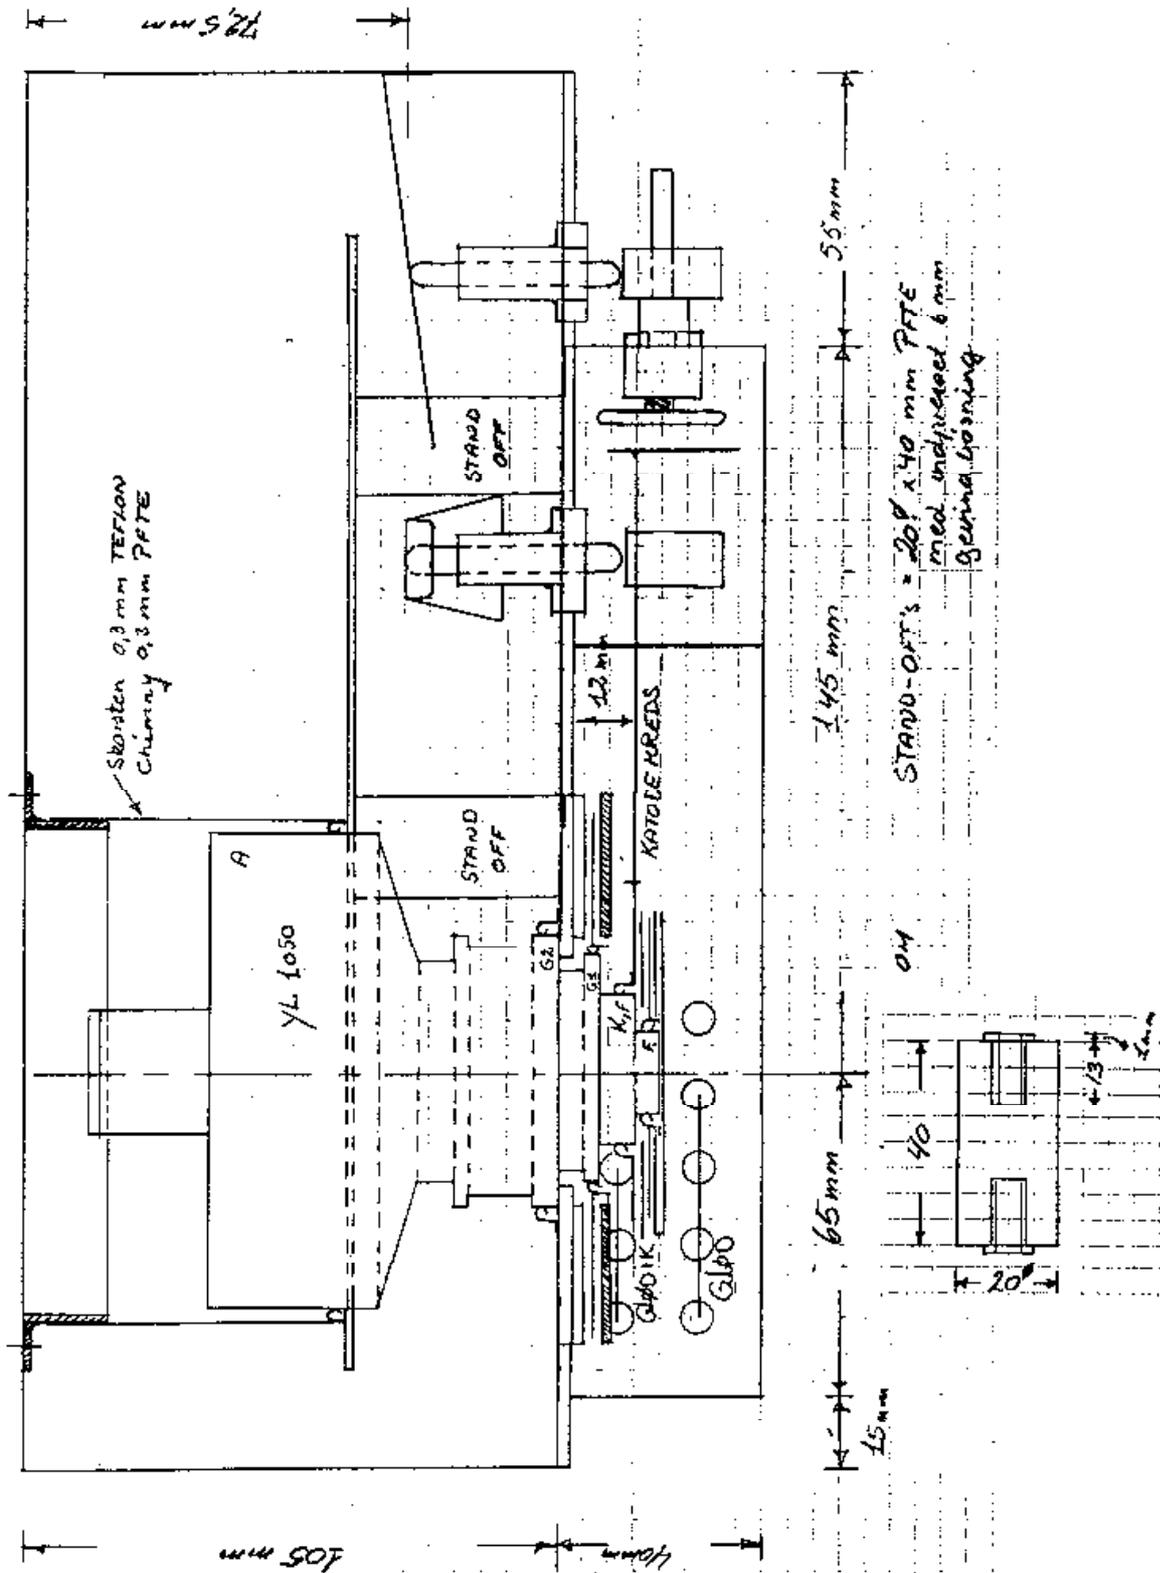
(BILD 6): PA Side View/PA Seitenansicht
